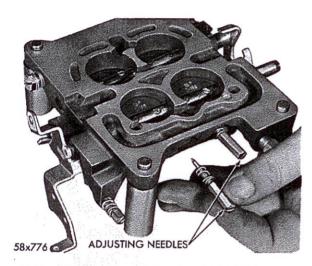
Removing or Installing Idle Mixture Adjusting Needles
